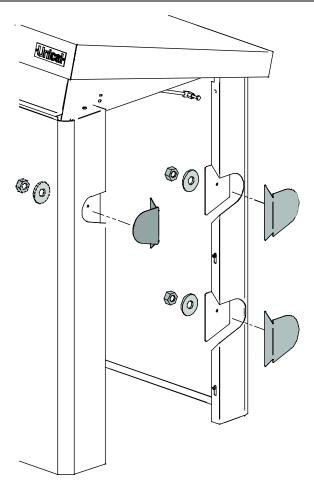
Caps and Plugs Used for Closing Up Vacated Gas and Hydraulic Connection Openings
